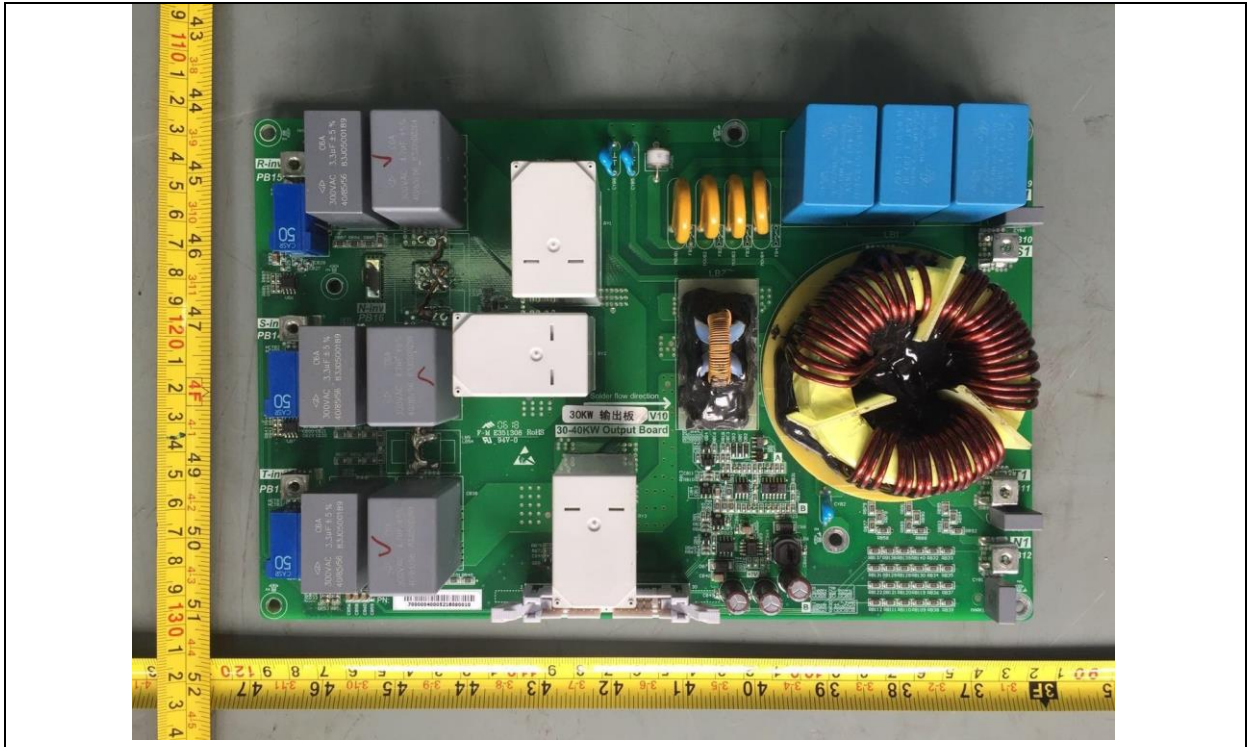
(AC Output board front view) SOFAR3000TL 、 SOFAR 33000TL
